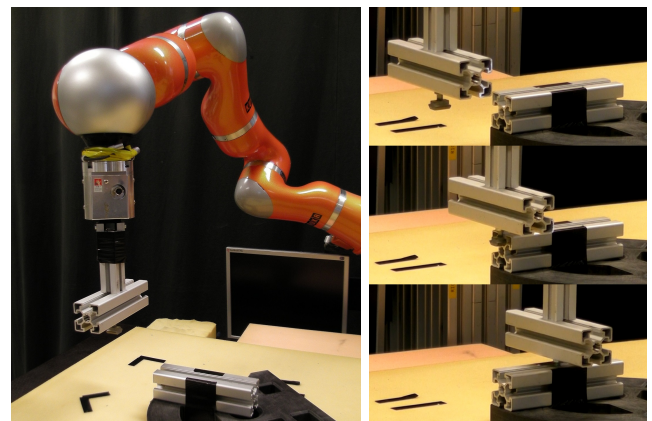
Experimental setup for slide-in-the-groove assembly task. Kuka LWR holds one part with bolt fitting that has to be inserted into another part in order to fix them together.
